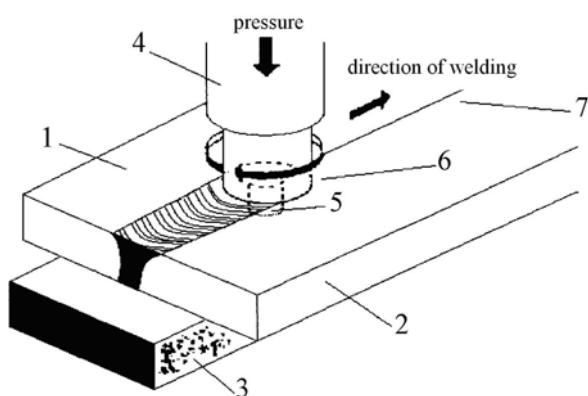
Principle of the FSW: 1 and 2-welding plates; 3-backing plate; 4-shoulder; 5-probe; 6-shoulder tip; 7-weld joint line
